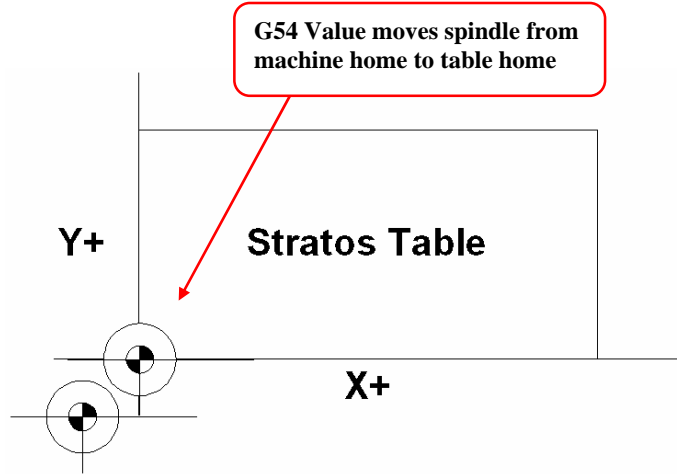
5 x 5 Drill Block – Work Offsets set position for primary spindle and Drill Block.
